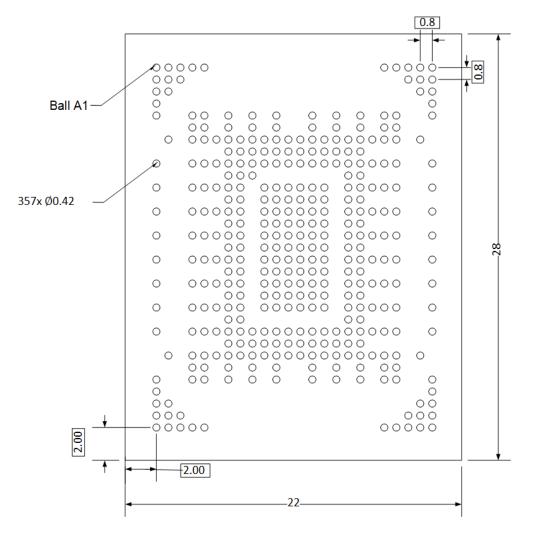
Recommended Land Pattern for M.2 Type 2228 BGA (Top View)
